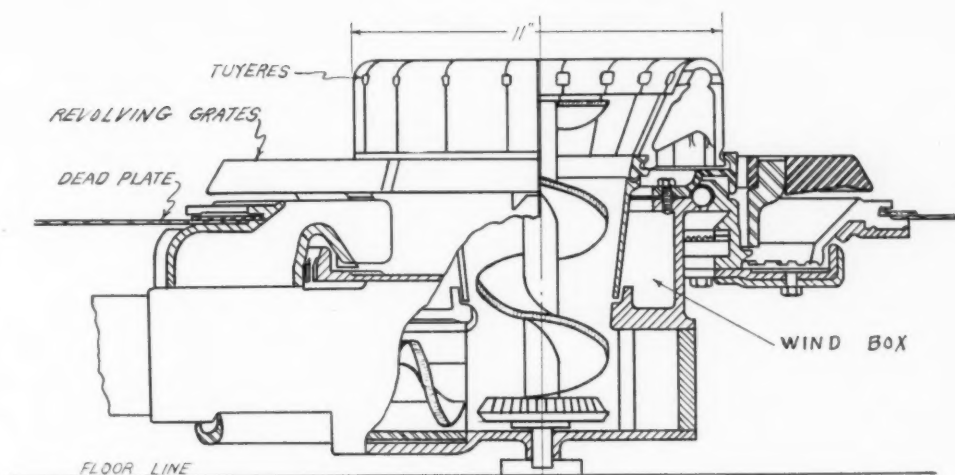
BURNER-HEAD ASSEMBLY OF CONVERTED STOKER UNIT
